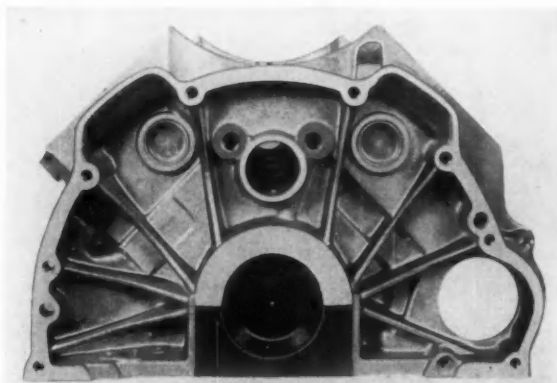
In new Buick aluminum engine, the mounting surface for both automatic and synchromesh transmissions is the ribbed, deep-section flywheel housing end of the cylinder block.
